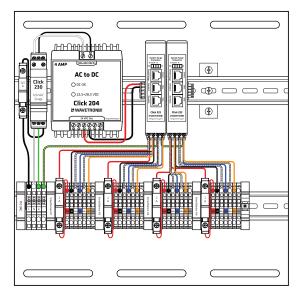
Intersection Preassembled Backplate (for traffic cabinet)
